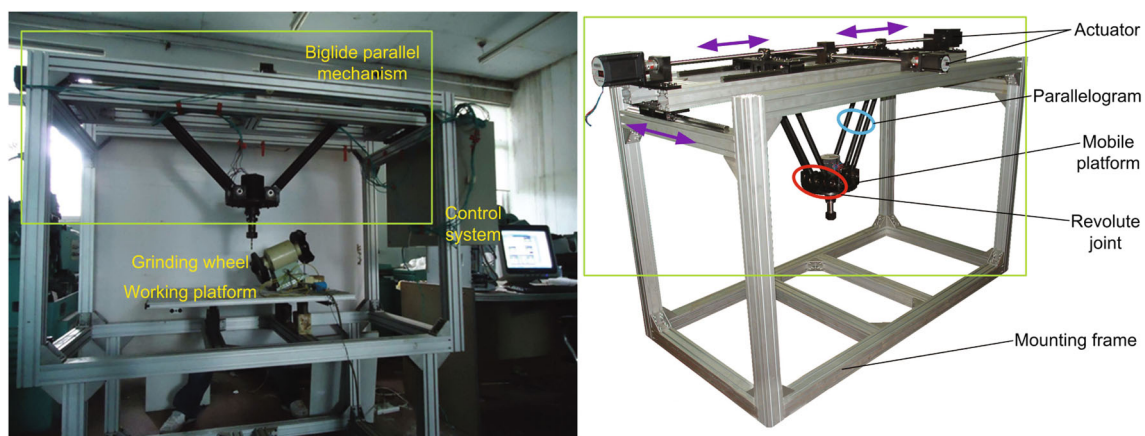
Prototyping of the grinding machine based on the Biglide parallel mechanism
